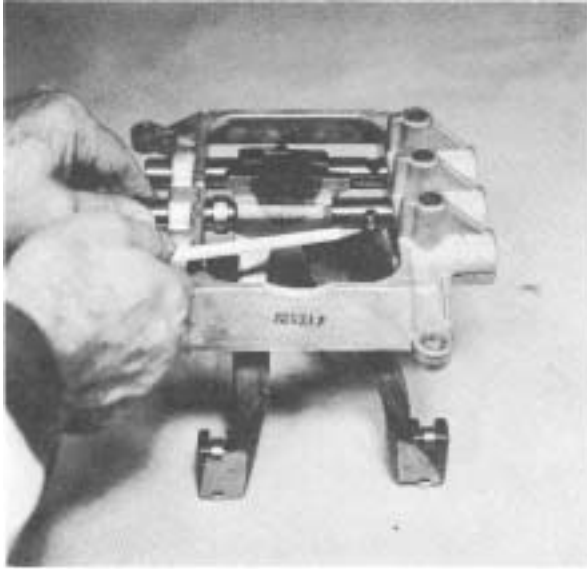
Remove 2nd & 3rd shift rod. CAUTION: Do not lose interlock cross pin or 2nd speed overdrive spacer.
